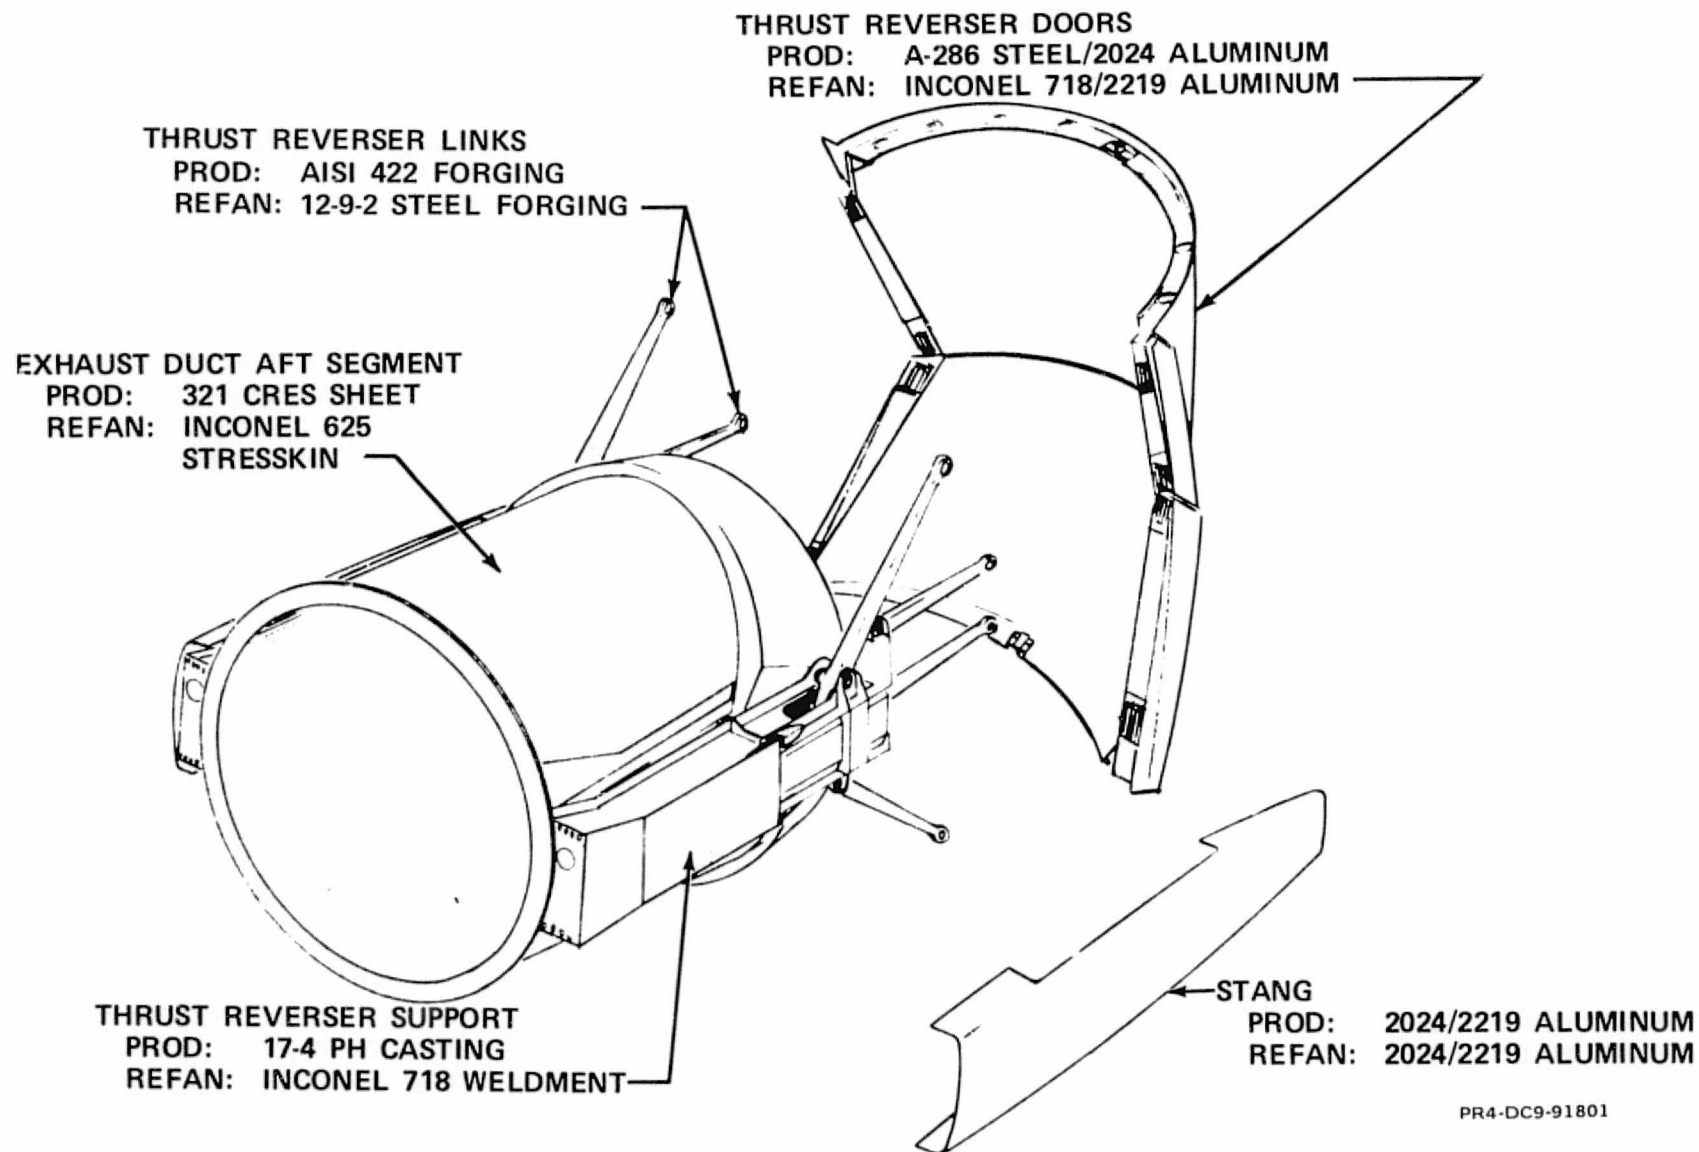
REAR VIEW - ENGINE AND EXHAUST SYSTEM
